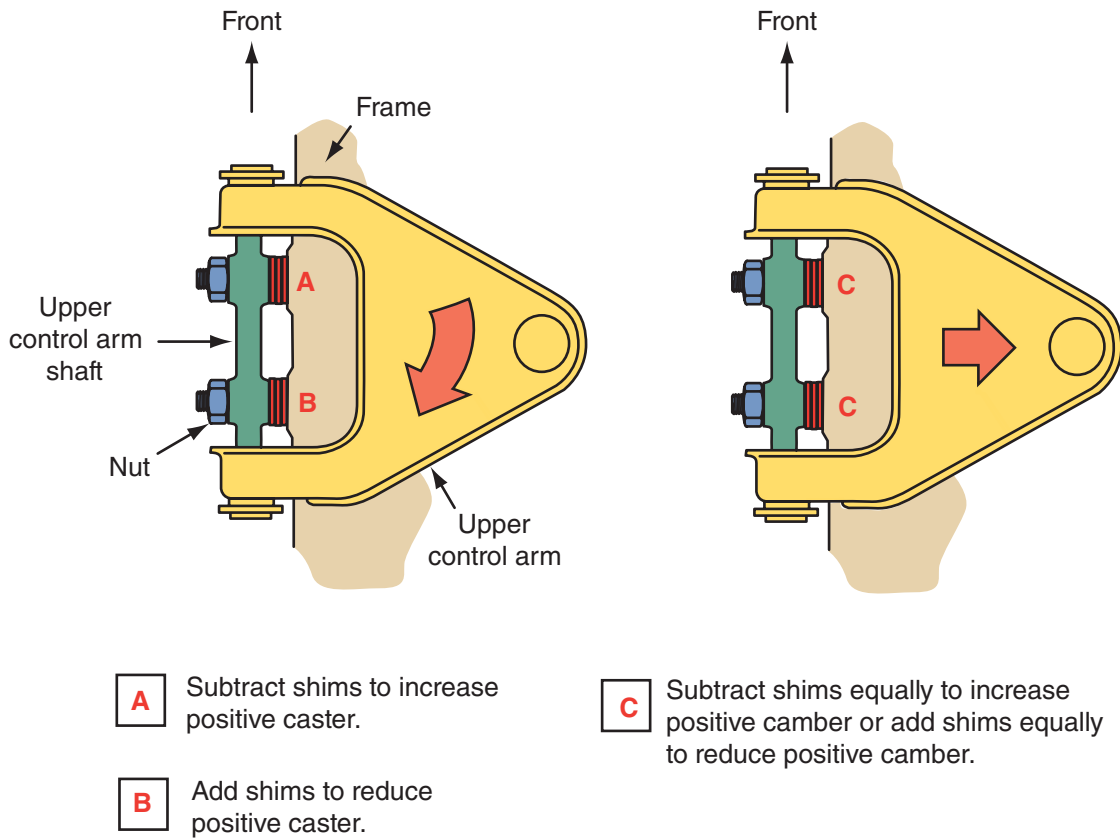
Adding and subtracting shims between the control arm and the frame will change caster and camber.
